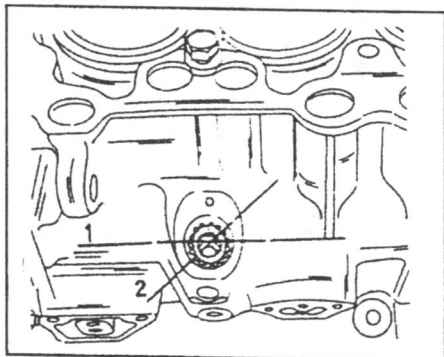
Fitting the oil pump/distributor shaft.
